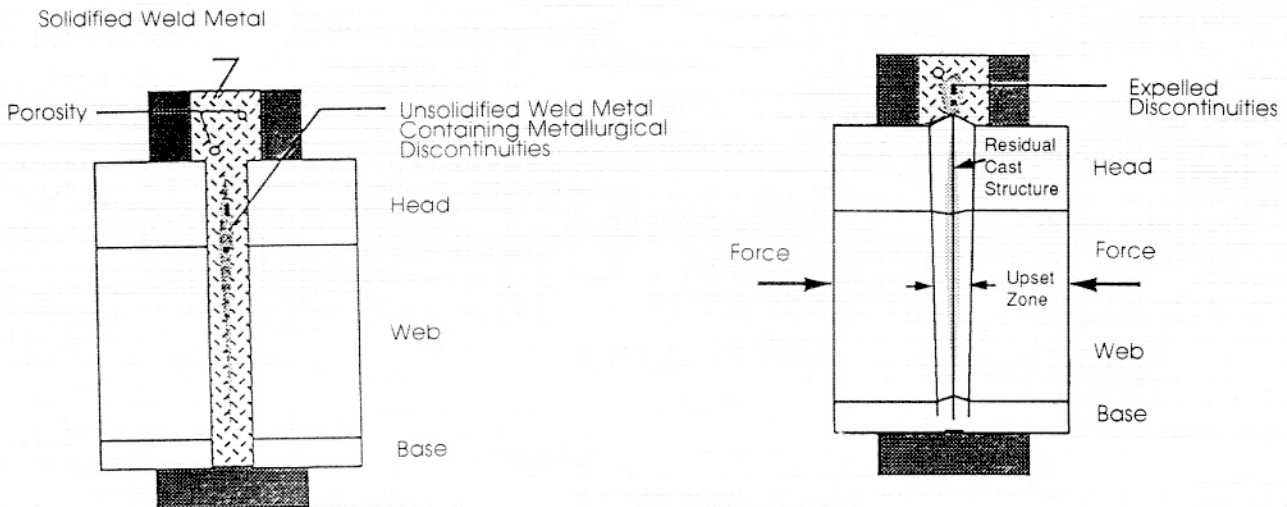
Schematic Drawing of Modified Thermite Welding Procedure
